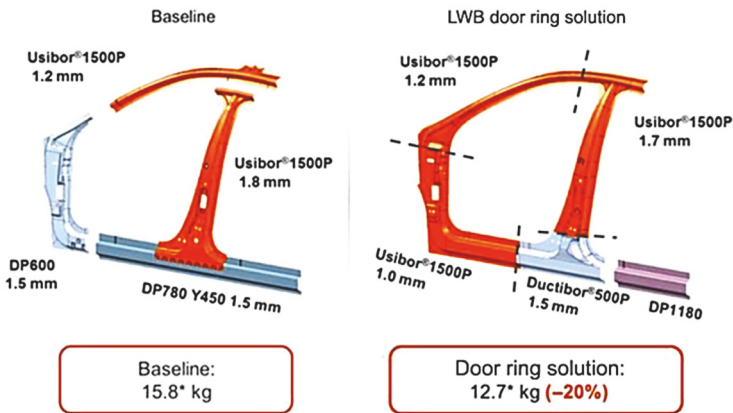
Advantages of hot stamping and forming of butt-welded plates compared to conventional hot stamping techniques [3]
